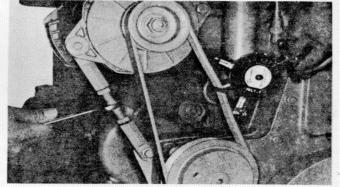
N-103. Adjust the Belt Tension 4. Tighten the adjusting link locknuts to 50 to 55 ft-lbs (68 to 75 N.m) torque.
